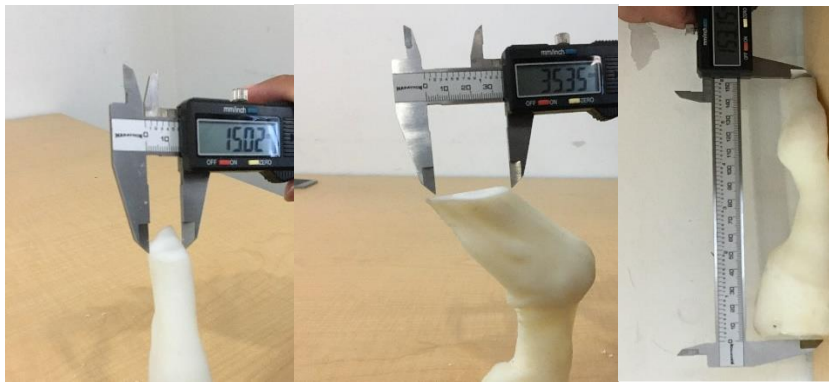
Corresponding dimensions in fabricated horse leg model measured using Vernier Caliper
